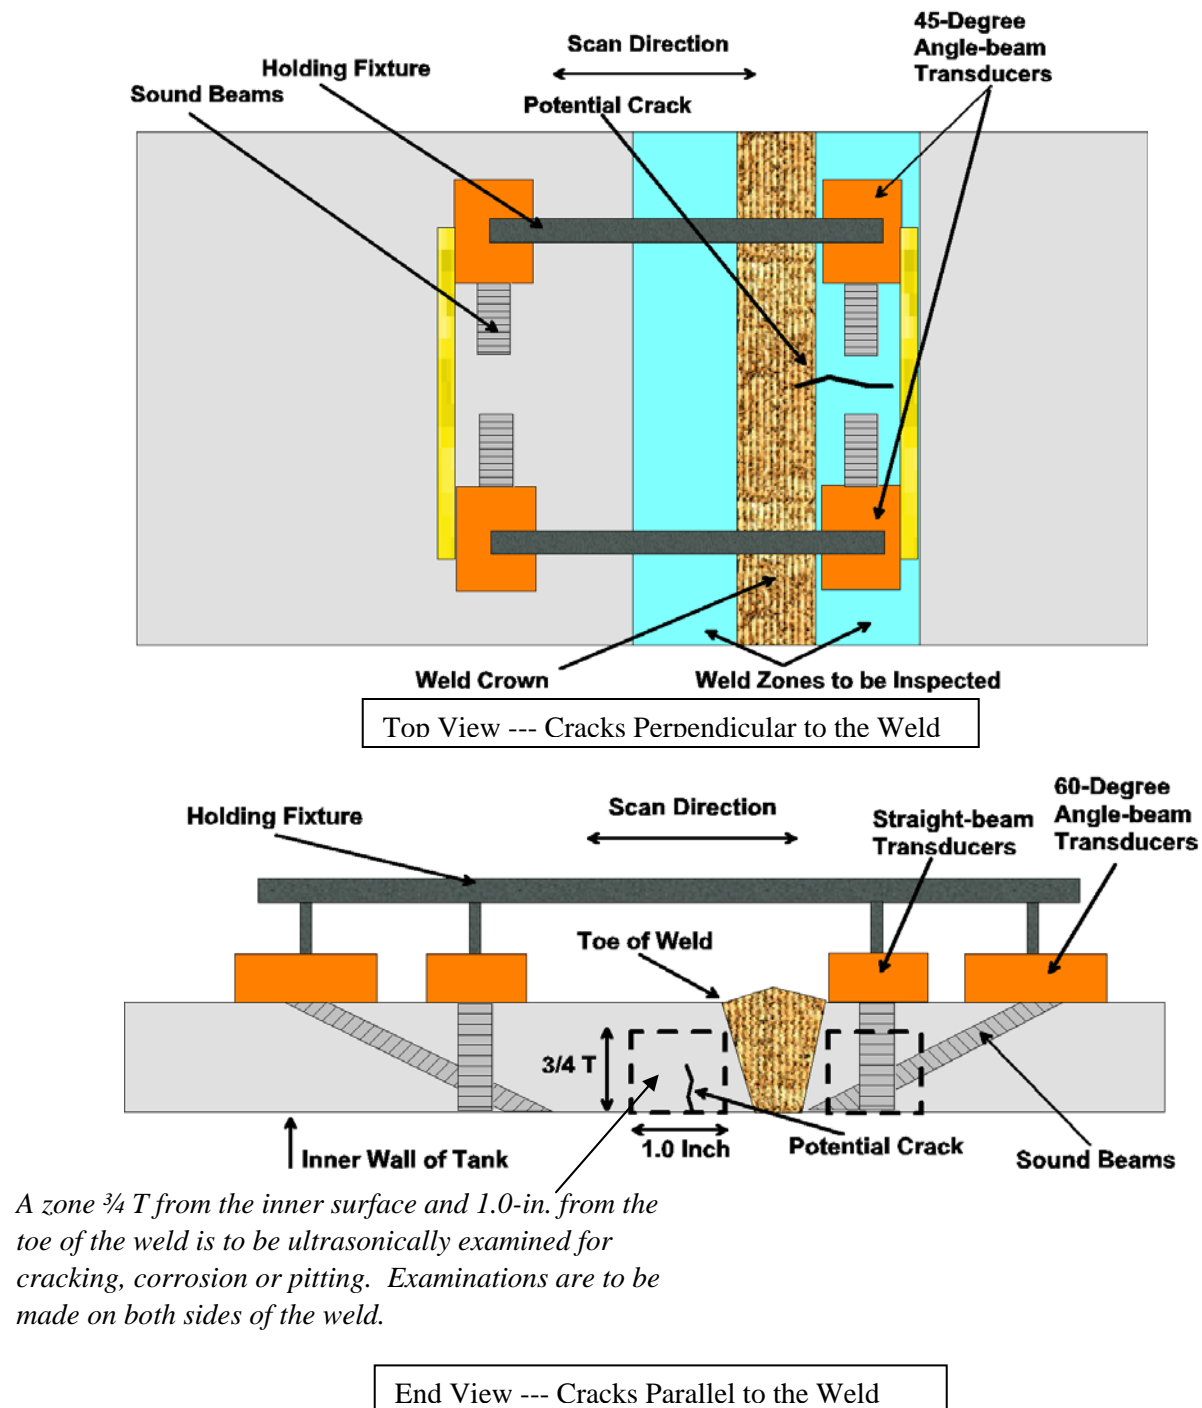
Views of the Weld Zone to be Ultrasonically Examined in the Primary Tank Wall
